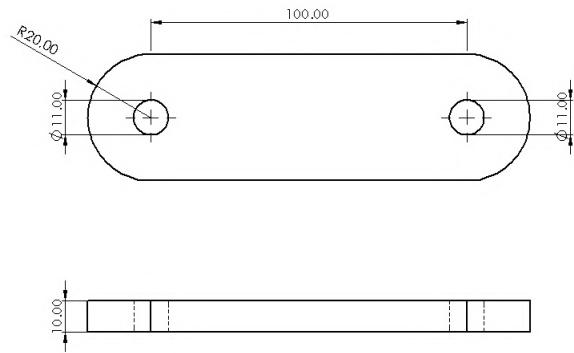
2D Drawing of the short link (All dimensions are in mm)
